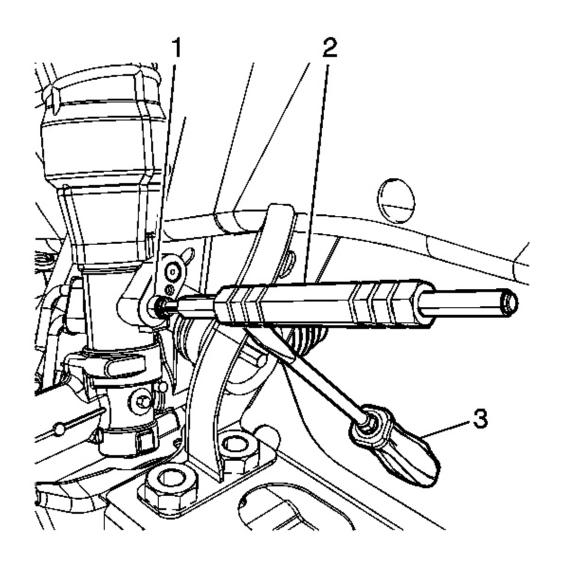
Removing Steering Gear Oil Seal Courtesy of GENERAL MOTORS CORP.
